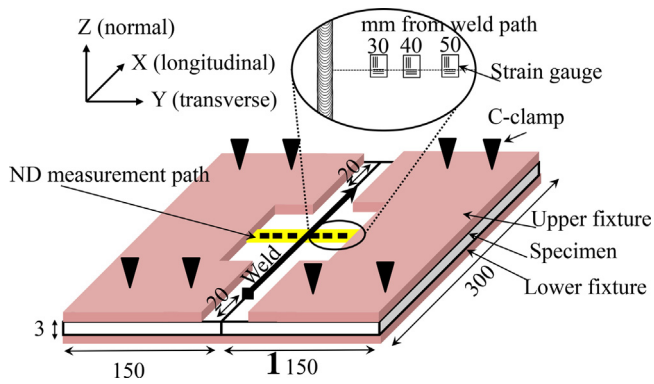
Dimensions and principal directions of the specimen, dimensions are in “mm”.
